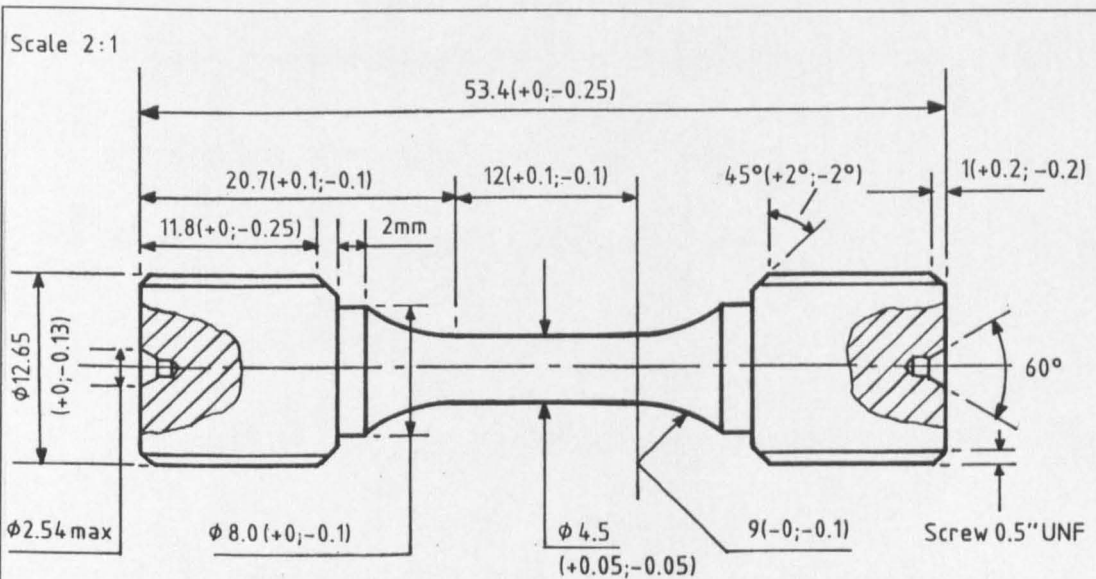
Figure IV.a. Technical drawing of the fatigue test piece geometry, used for stress-corrosion tests in this study
